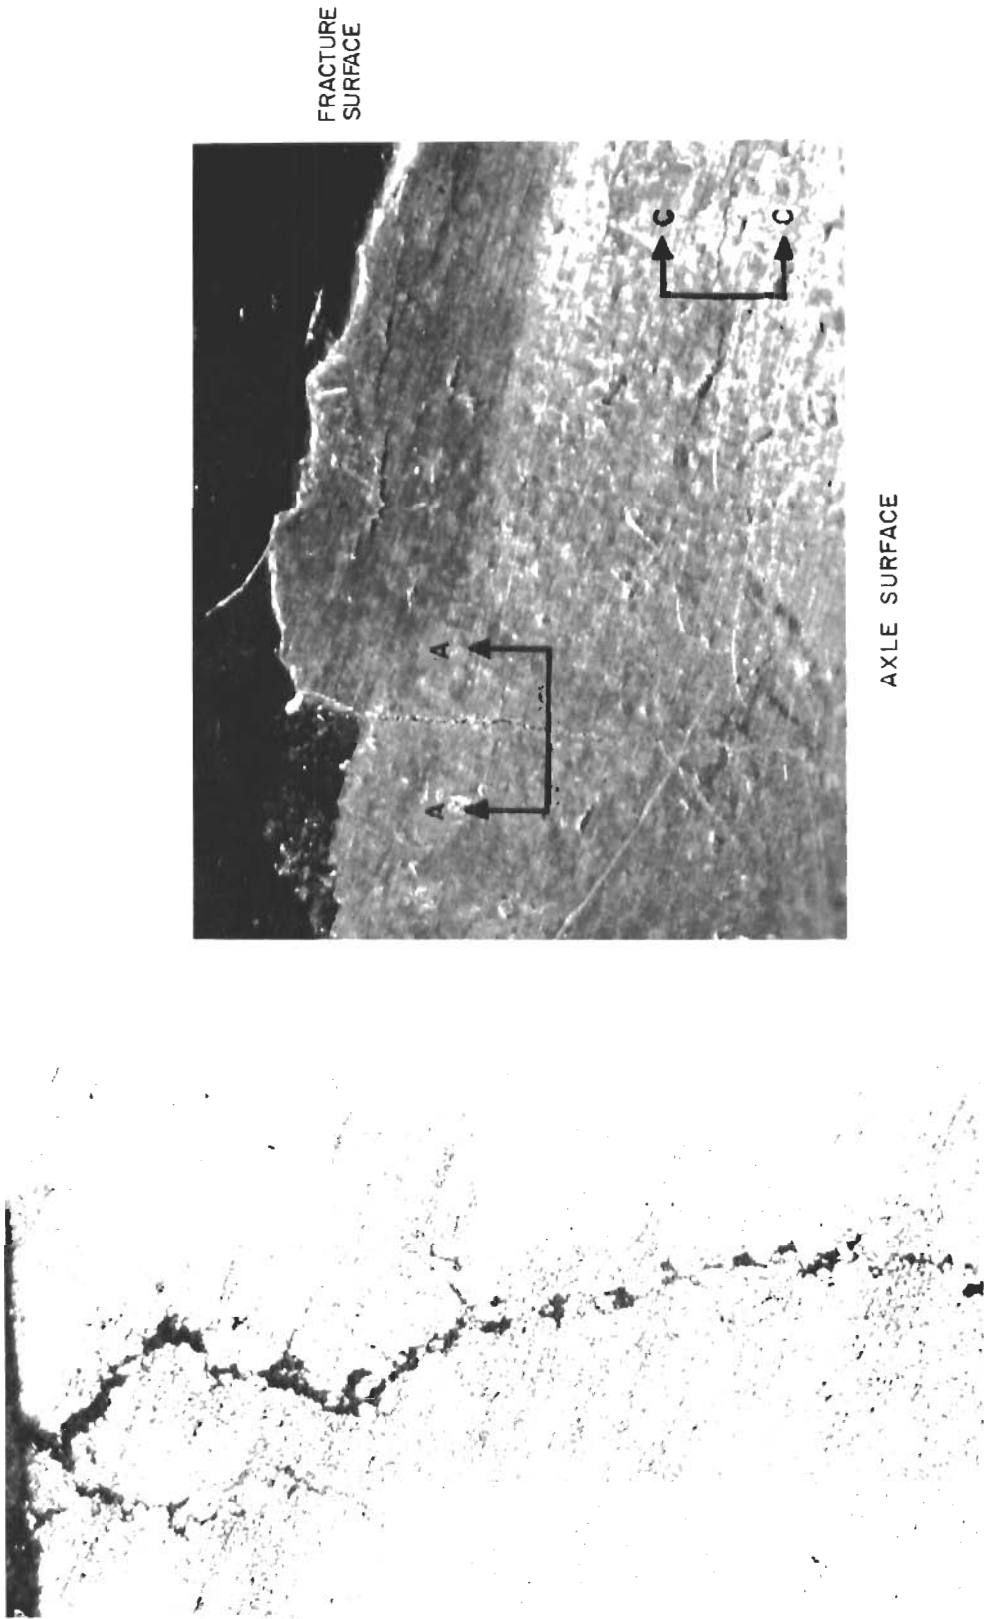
Intergranular Cracking Near Fracture Origin Axle Beam Failure 9/61
